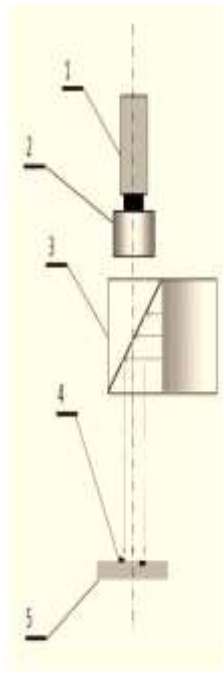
A New Camera Based Machine Vision System for the Automatic Inspection of Surface Defects
